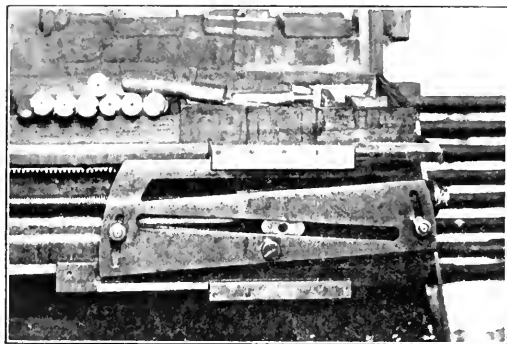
LEAD-ADJUSTING ATTACHMENT FOR LATHE
